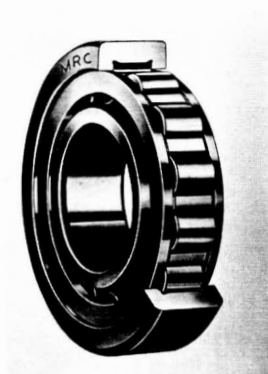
Cylindrical-roller bearing. (Courtesy Marlin Rockwell Corporation.)
